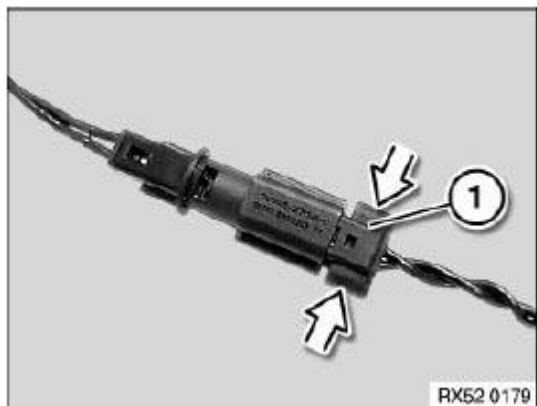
Pressing Locking Clip Of Edge Disconnecting Plug
